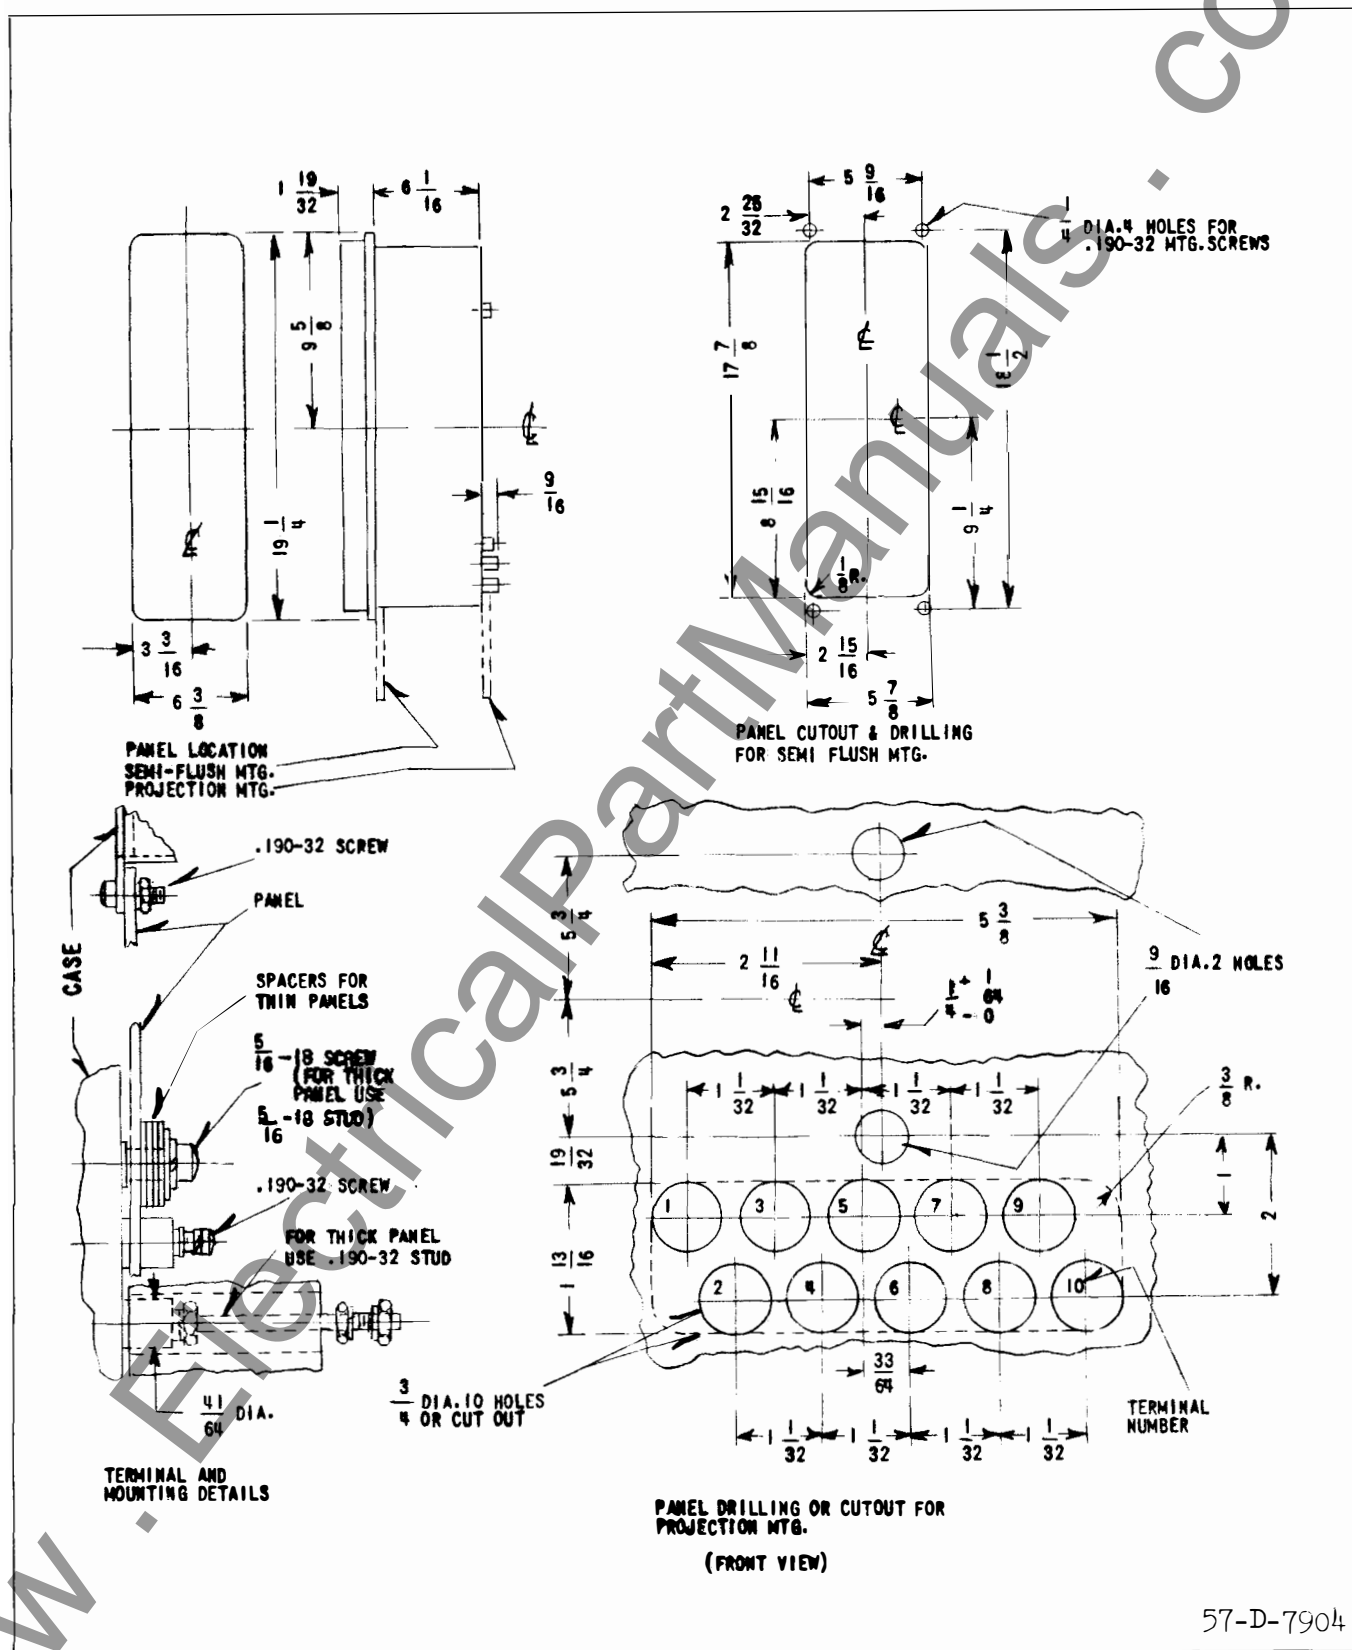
Outline and Drilling Plan for the Type FT41 Case
